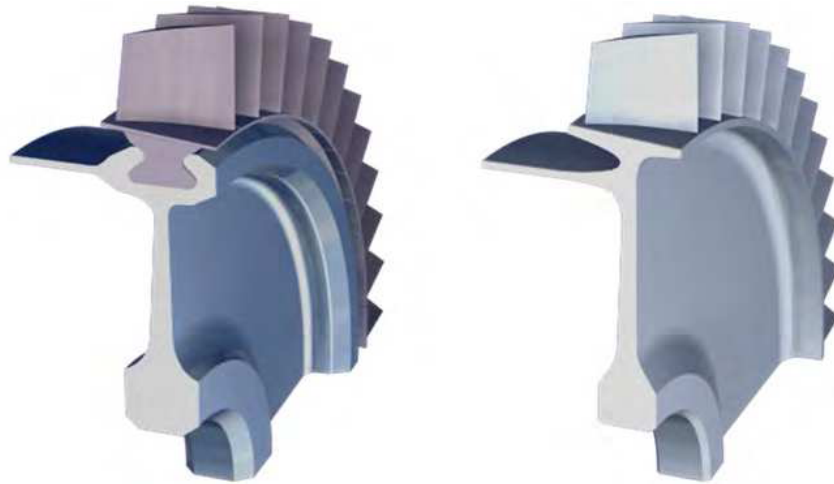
Aero engine turbine/compressor: Left – Traditional blade & disk assembly. Right – New BLISK component [10]. (© 2011 Antonio M. Mateo Garcia. Originally published in A. Mateo Garcia, "BLISK fabrication by linear friction welding," *Advances in Gas Turbine Technology*, pp. 411-434, 2011. Under CC BY 3.0 license. Available from DOI: 10.5772/21278.)
